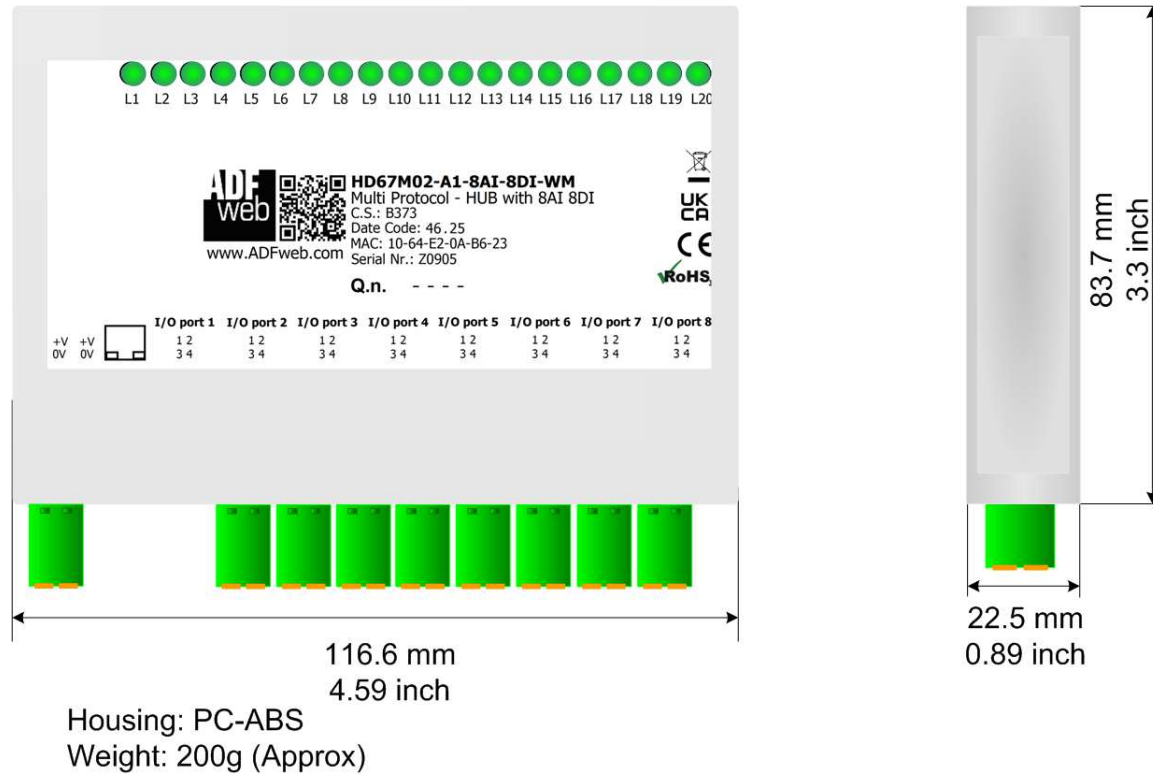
Mechanical dimensions scheme for HD67M02-A1-8AI-8DI-WM
